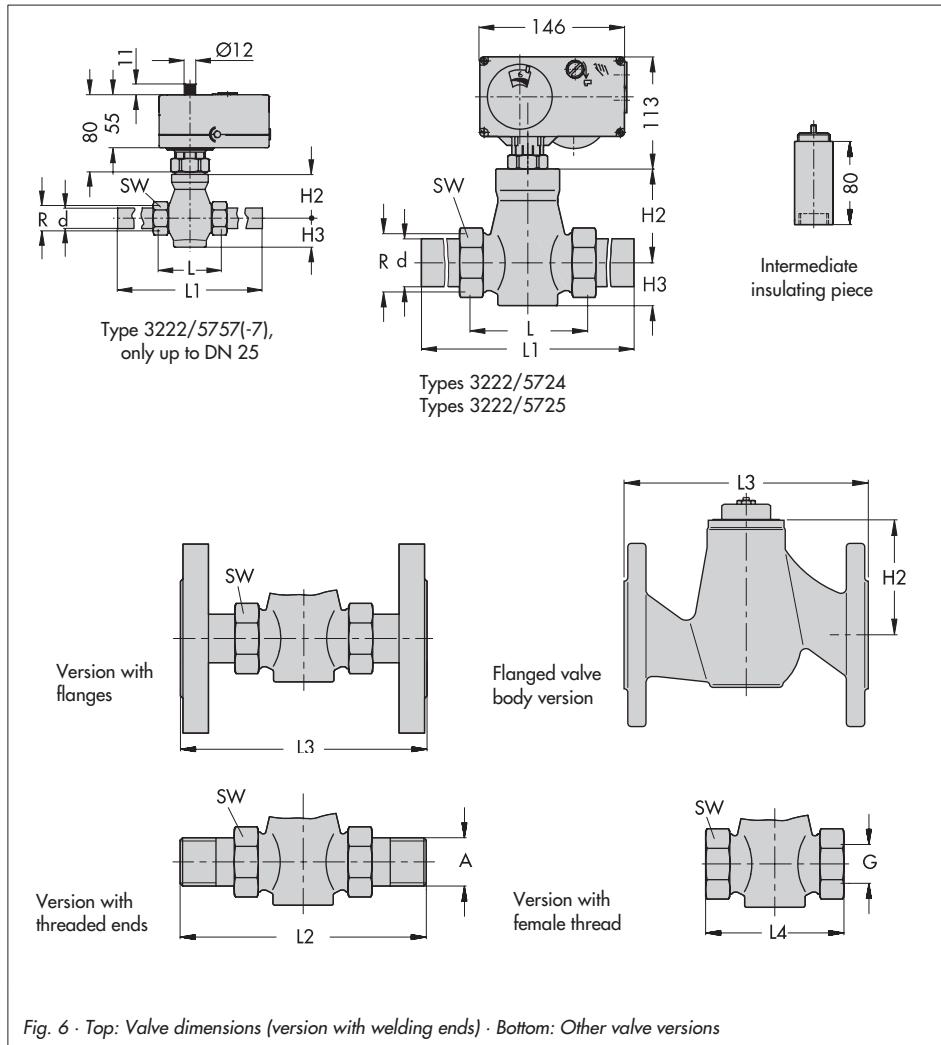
· Top: Valve dimensions (version with welding ends) - Bottom: Other valve versions
